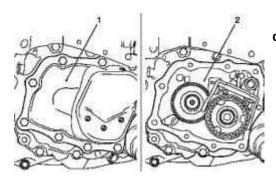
Removing the back cover of gearbox: 1, 2 - lid
